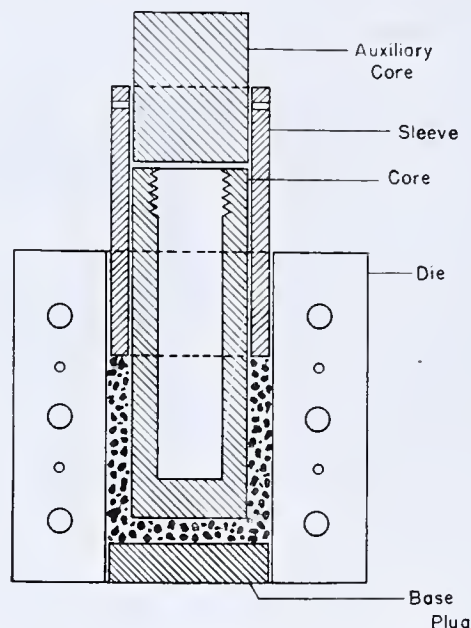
ASSEMBLY FOR FORMING CRUCIBLES
